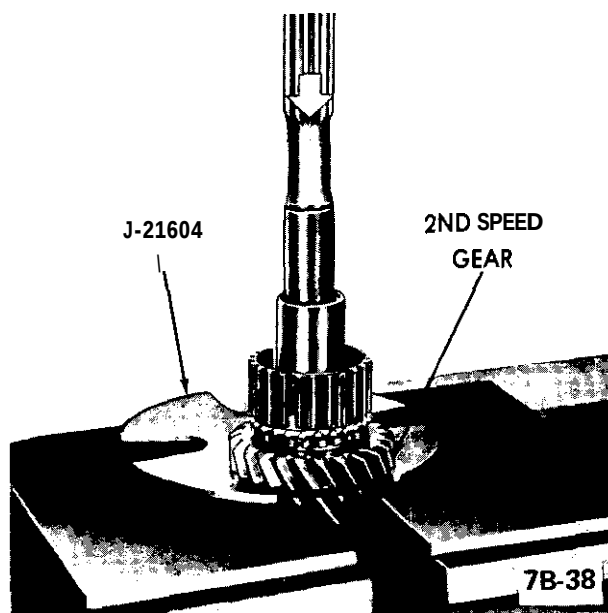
B-38 Pressing Off Large Clutch Hub and Needle Bearing Inner Sleeve
